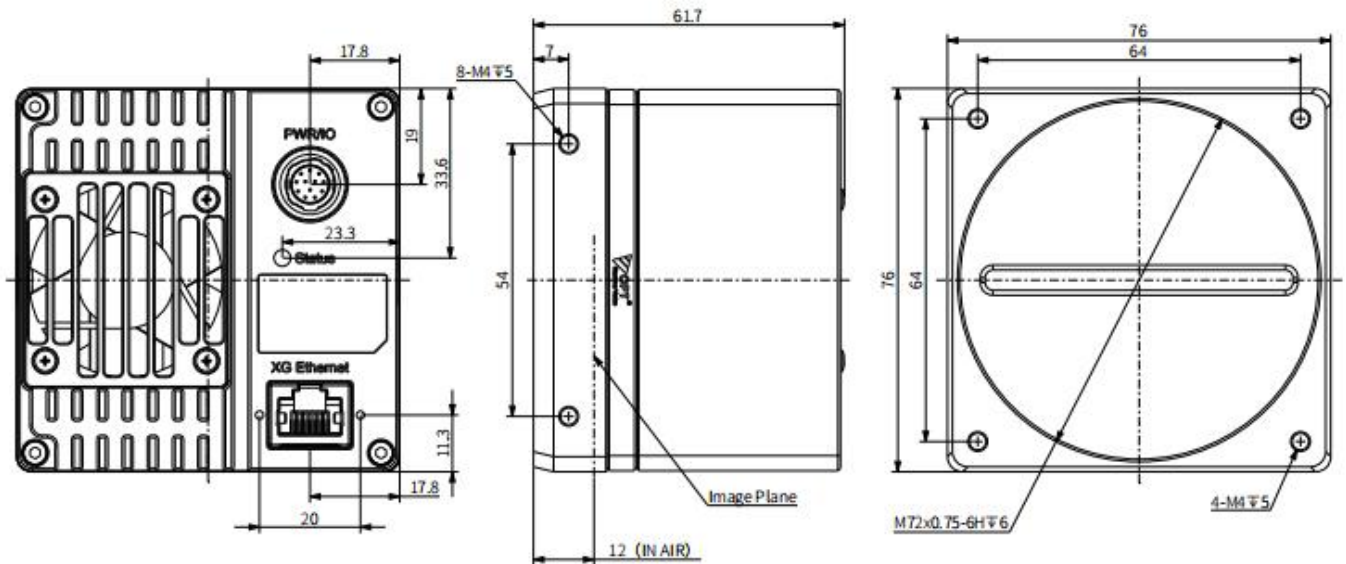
Dimensional drawing of Line Scan camera with 10 Gigabit ports
